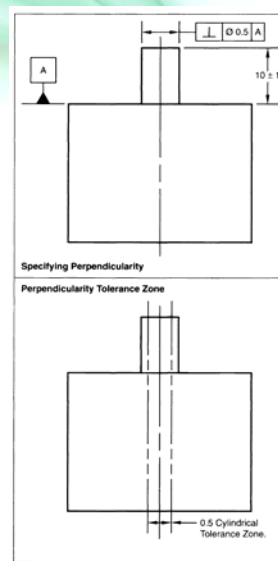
Perpendicularity tolerance applied to an axis
